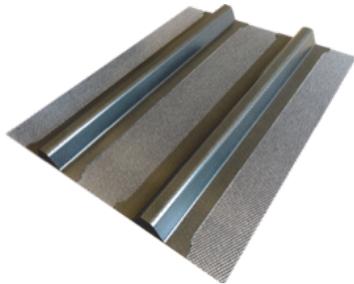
Omega stiffened demonstration panel assembled by means of continuous ultrasonic welding within the EcoTECH project.
